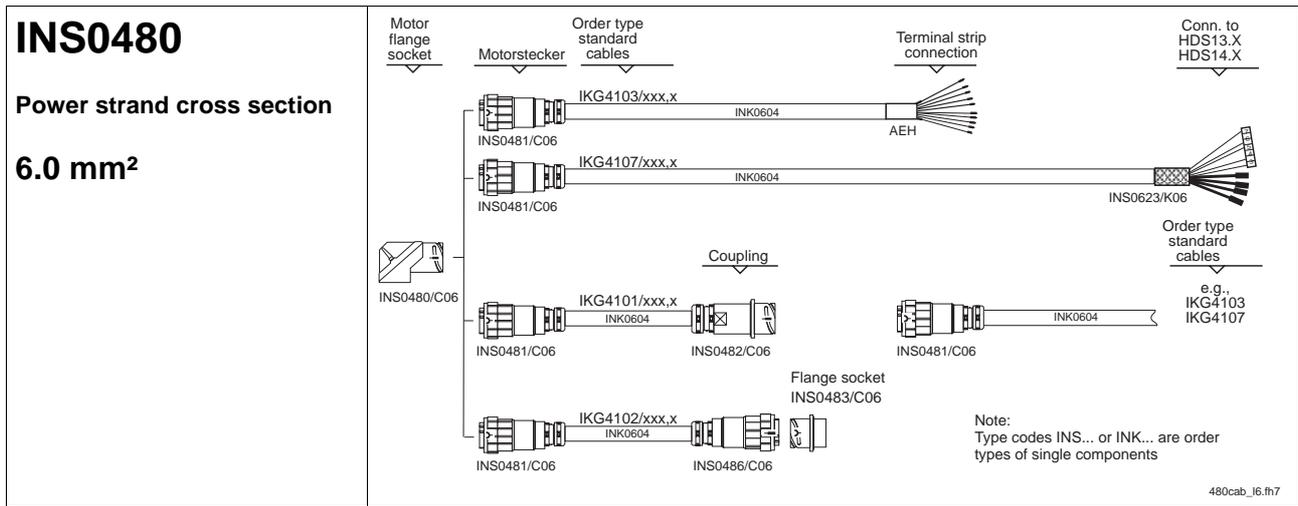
Motor power cable 6.0 mm<sup>2</sup> of flange socket INS0480
